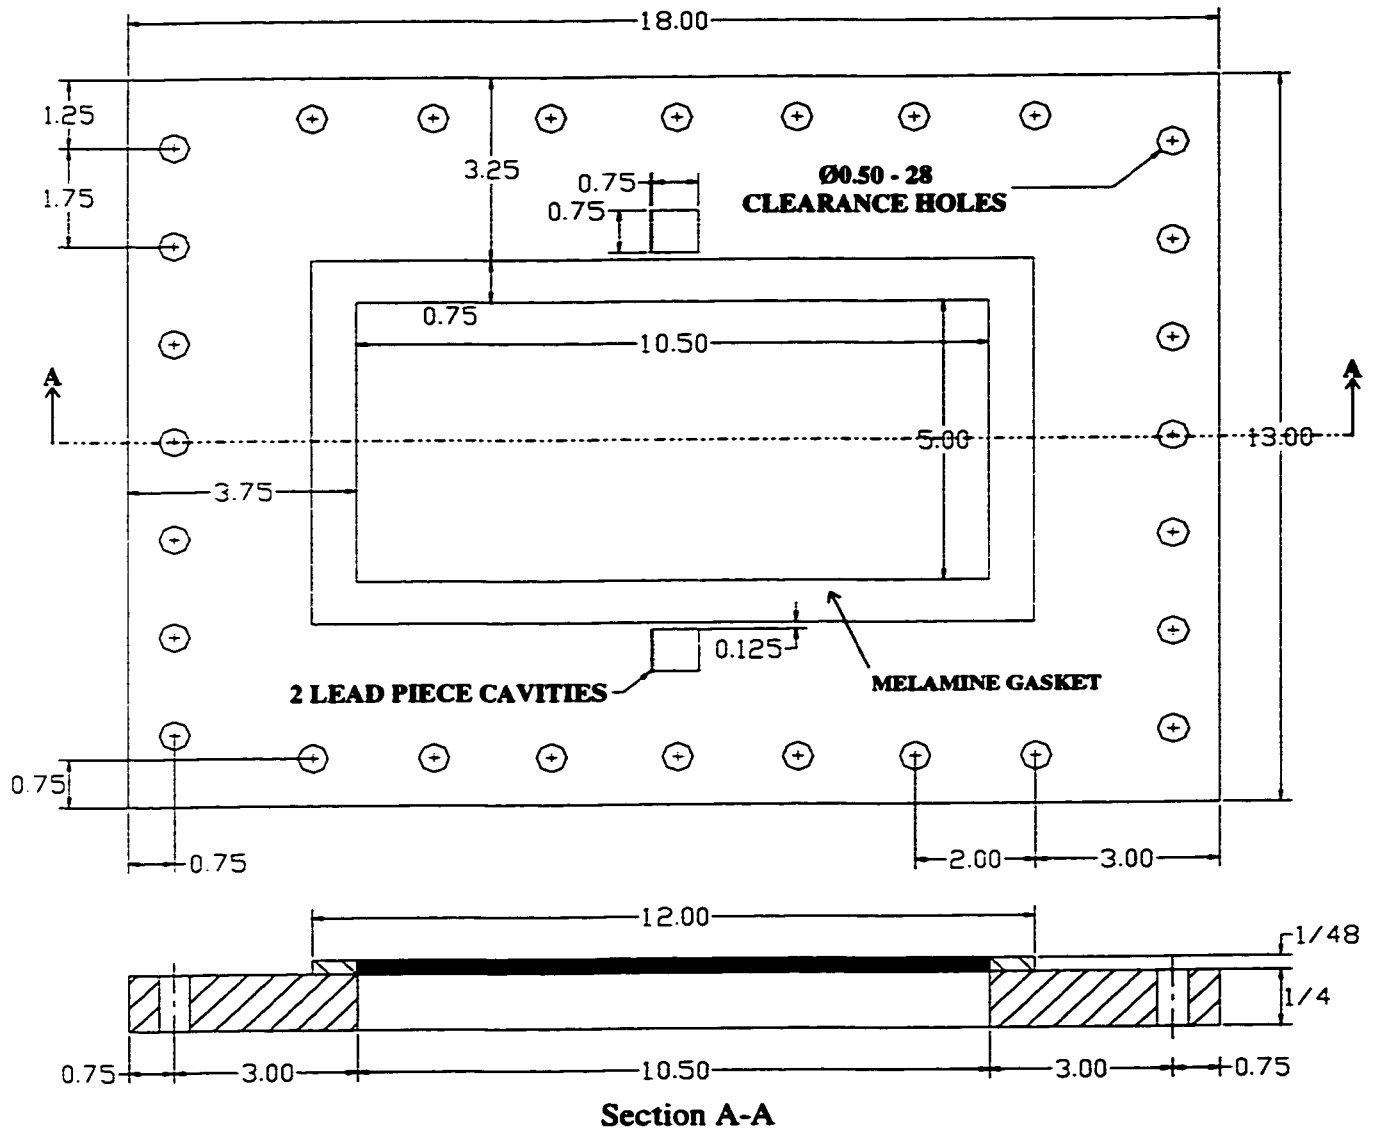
Aluminum base of the resin mold (Dimensions are in inches).
